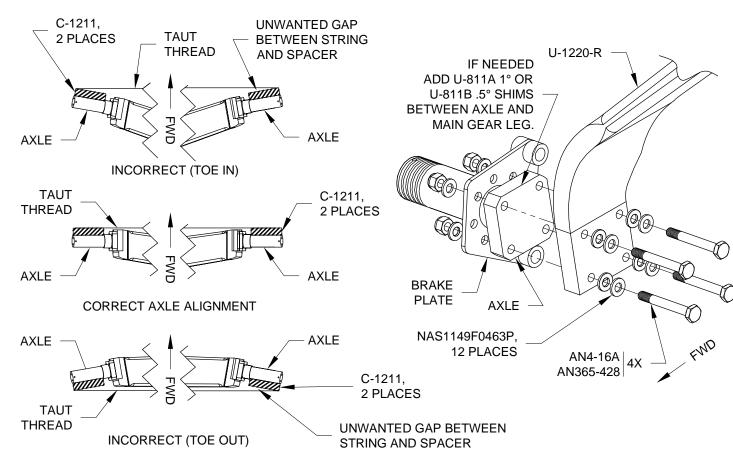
ATTACHING AND ALIGNING THE MAIN GEAR AXLES
